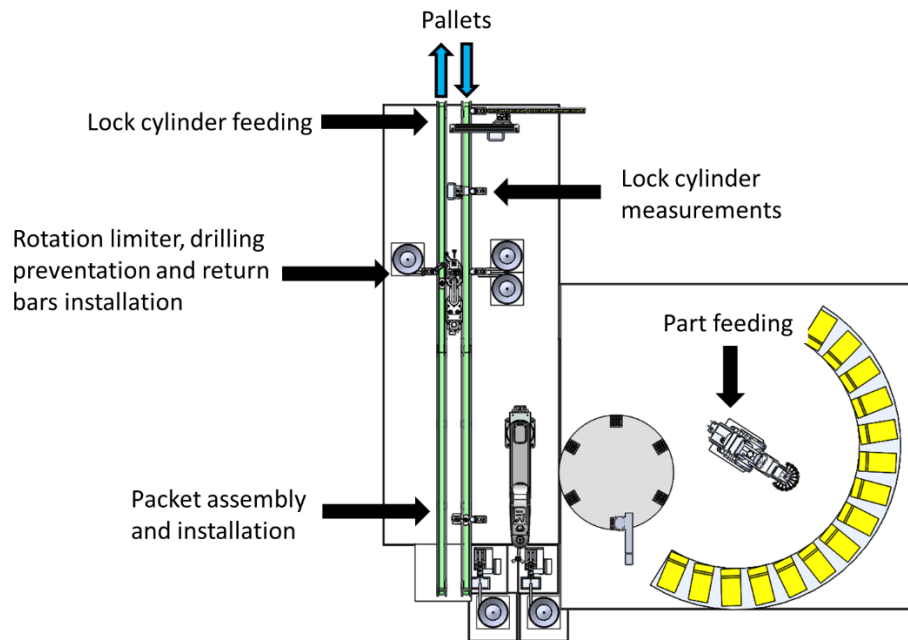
Position of different work phases in proposed assembly machine with mechanical feeders.
